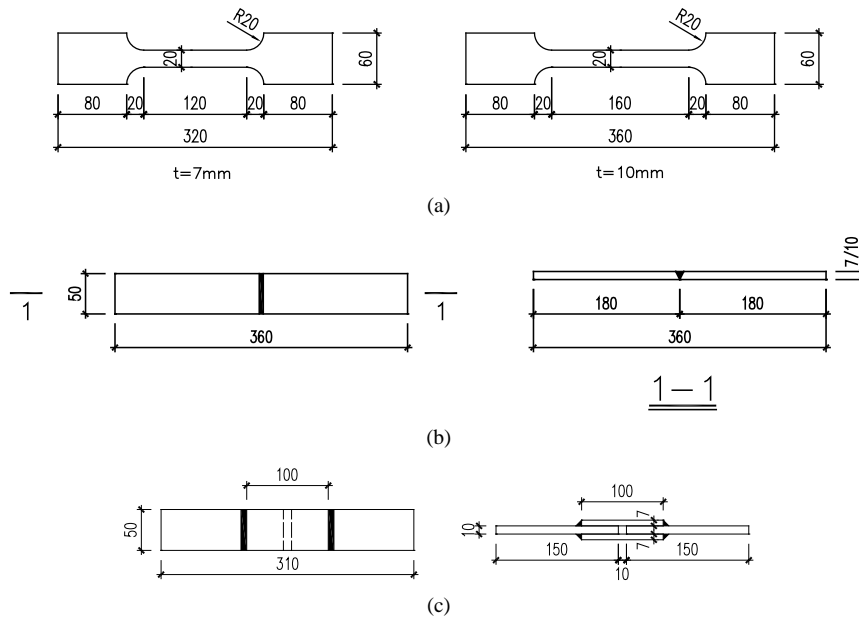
Diagram: dimension of the specimens: (a) Specimen of material properties; (b) Specimen of butt welding; (c) Specimen of fillet welding
